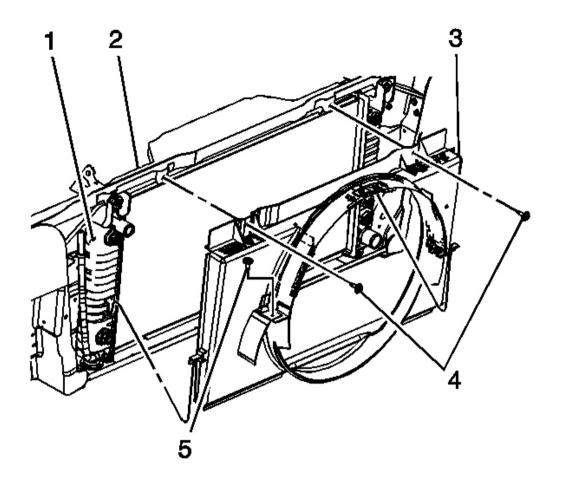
Identifying Fan Shroud Courtesy of GENERAL MOTORS CORP.
